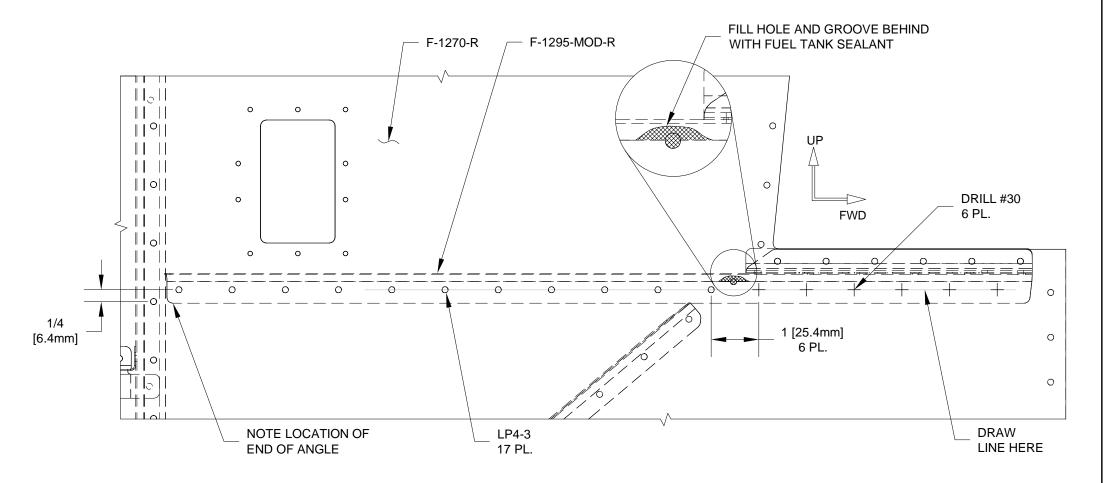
DRILL SIDE SKIN FOR FWD END OF SKIN STIFFENER
